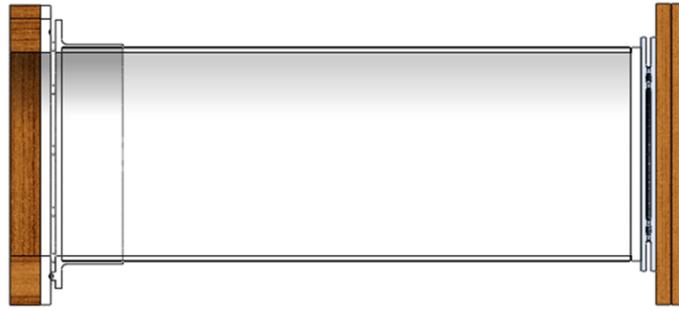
Full Sectioned side view of the payload housing and bearing system
